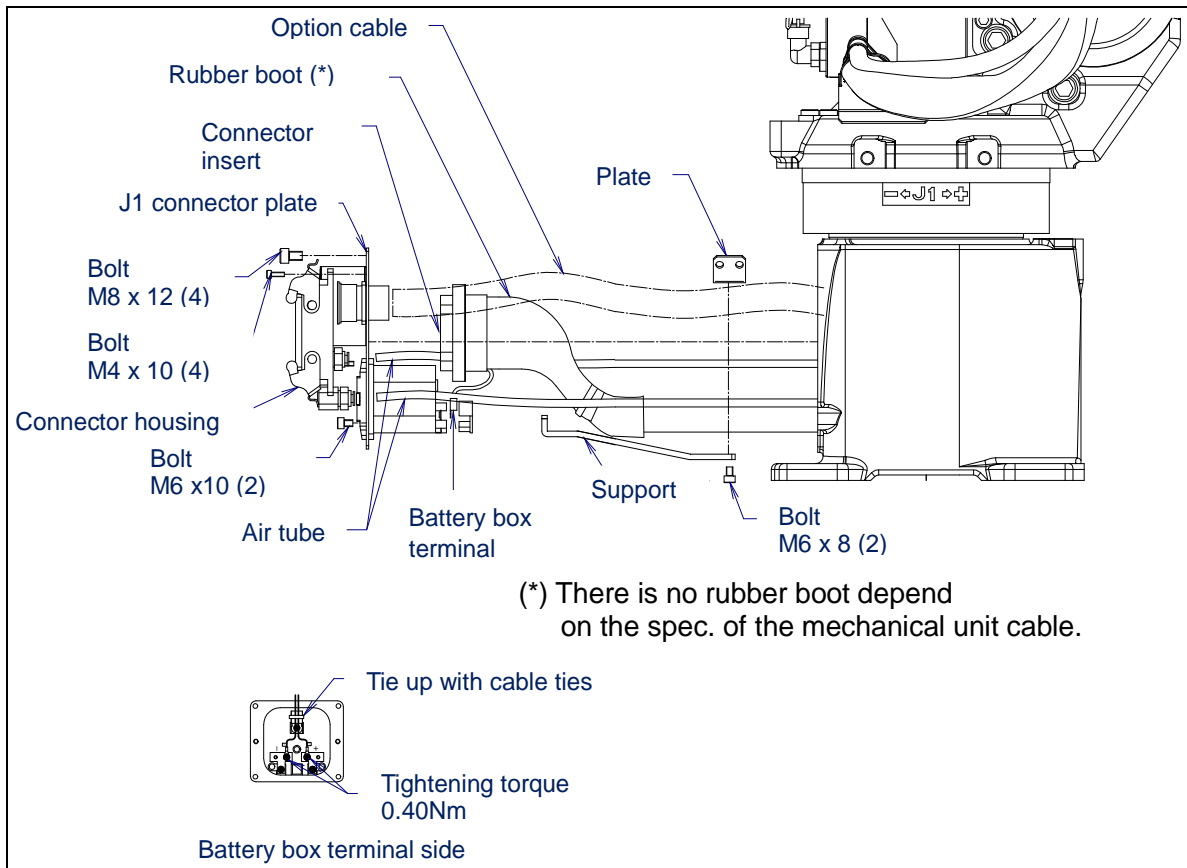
(j) Replacing cable kit (J1 connector plate part 1)
